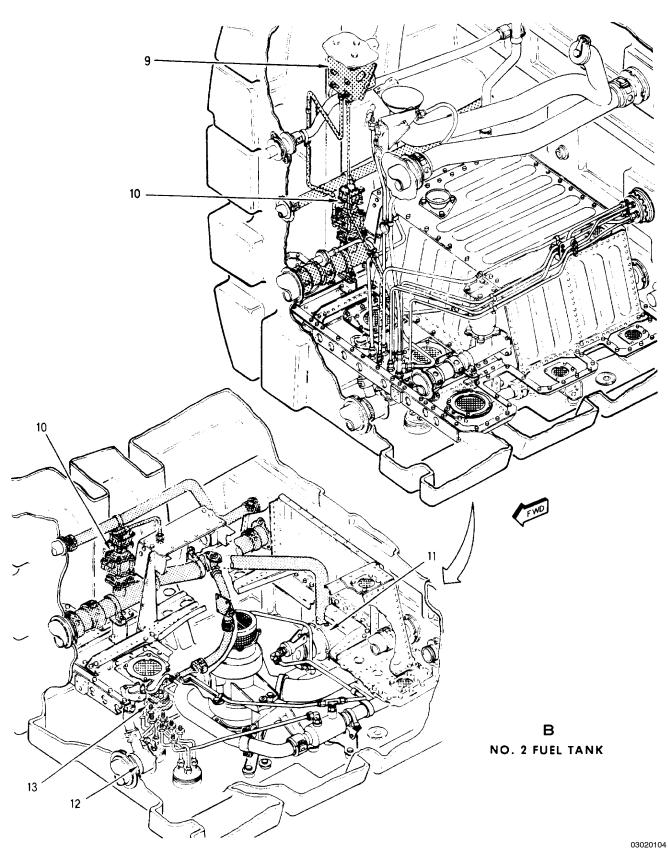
Refuel/Defuel System Component Locator (Sheet 4)
